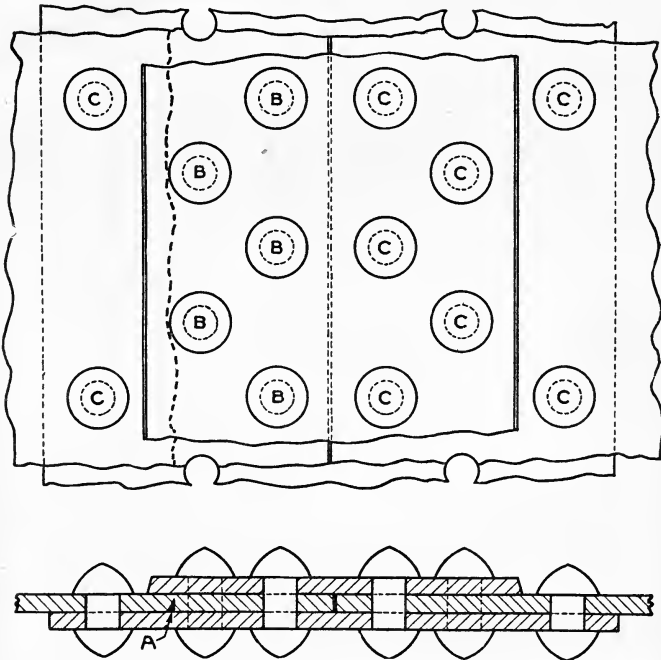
Double riveted lap joint changed to triple riveted butt strap type.
